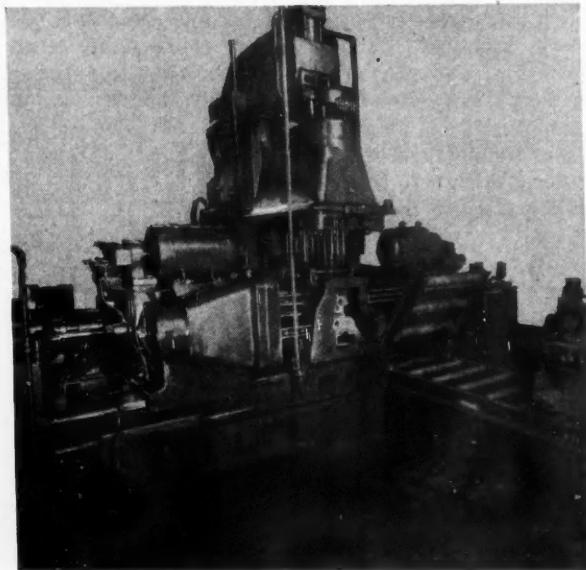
One of the four, three-way multiple head Baush driller and tappers in the 8-cylinder line. This driller has 83 spindles. It is arranged at right angles to the conveyor line and provided with a fixture which permits the work to feed through
